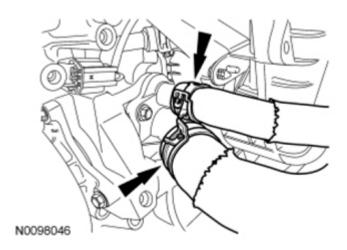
Locating Auxiliary Coolant Pump Hose And Upper Radiator Hose Courtesy of FORD MOTOR CO.
